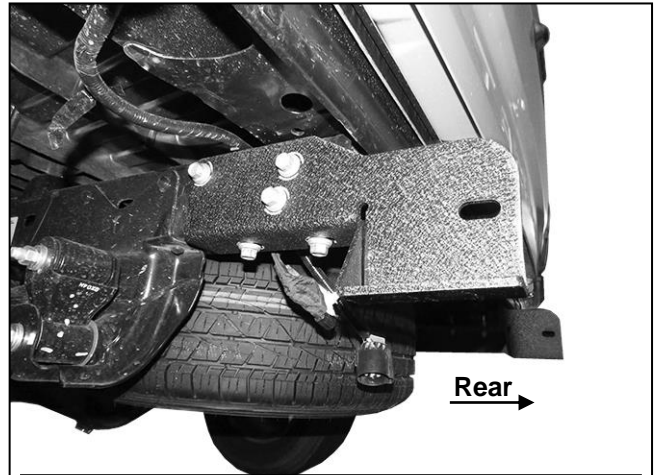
Models without factory receiver hitch: Reuse factory hex bolts to attach Mounting Bracket to side of frame. Use 12-1.25mm Fine Thread bolts on the bottom of the Bracket
